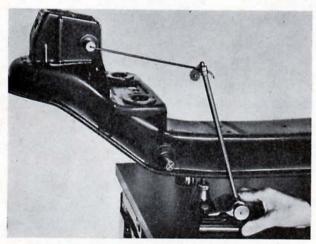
Checking the height of the upper fulcrum shaft centre with a surface gauge
